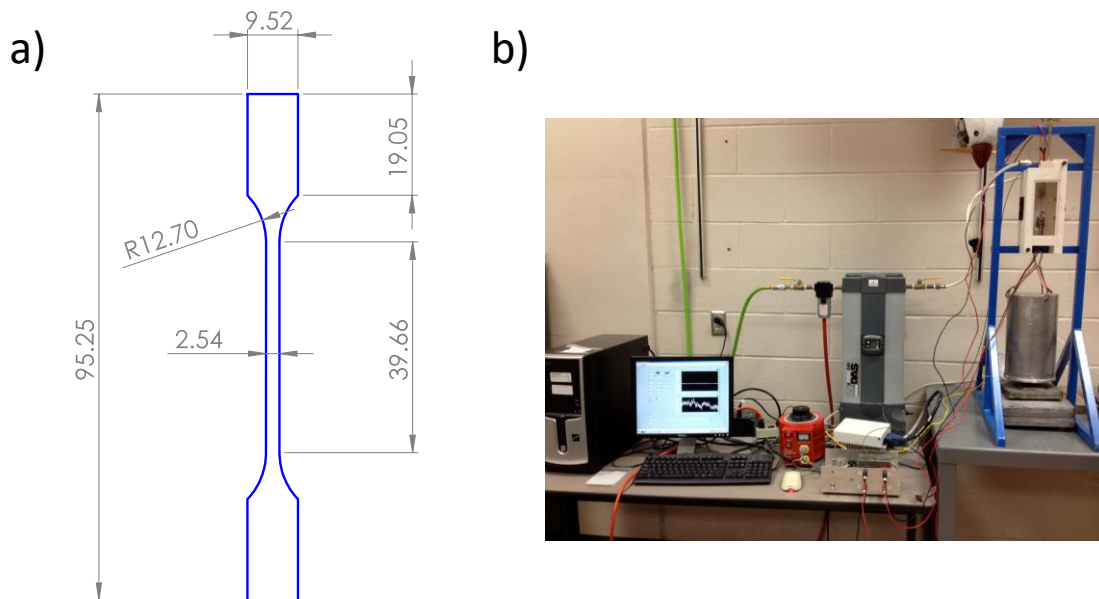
a) Technical drawing of flat dog bone samples used in tension actuation fatigue tests. All dimensions are in mm. Thickness can be anywhere between 0.75 mm to 1.5 mm
